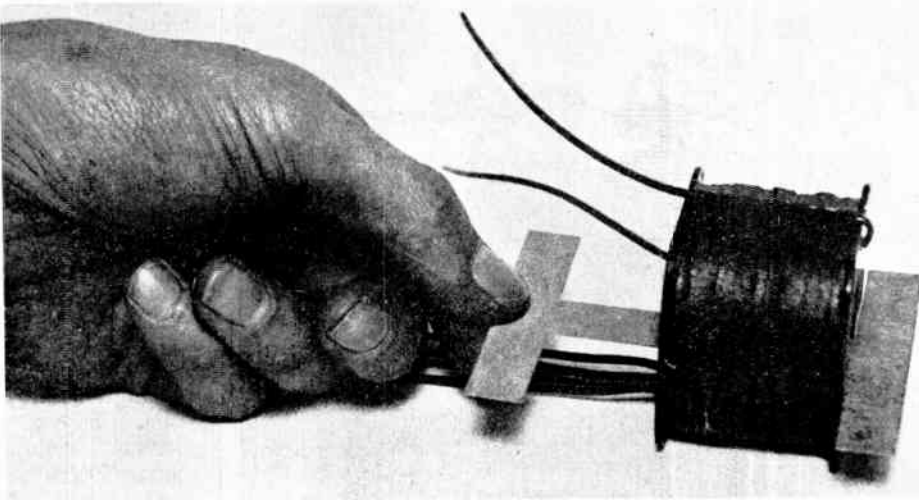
ASSEMBLING THE STAMPINGS. FIRST STAGE.
